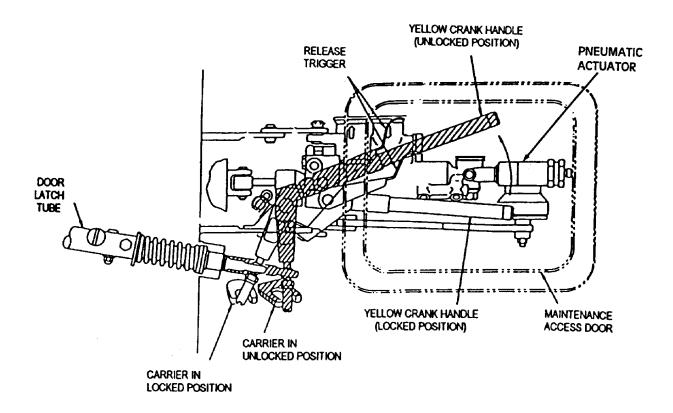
B-757 Off-Wing Escape Slide Actuator Assembly
